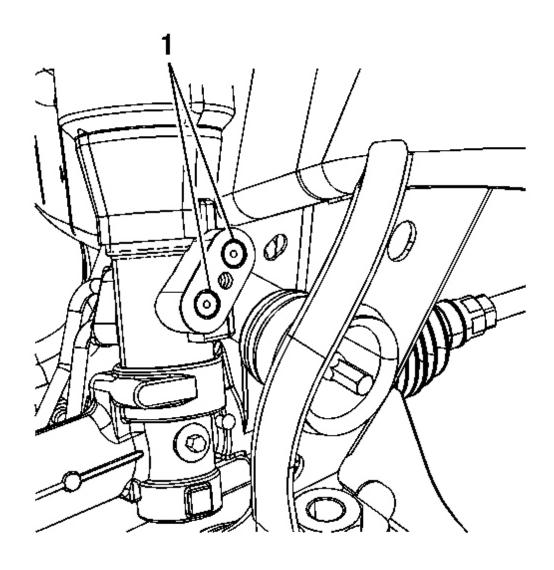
Ensuring Power Steering Gear Oil Seals (Are Fully Seated In Power Steering Gear
